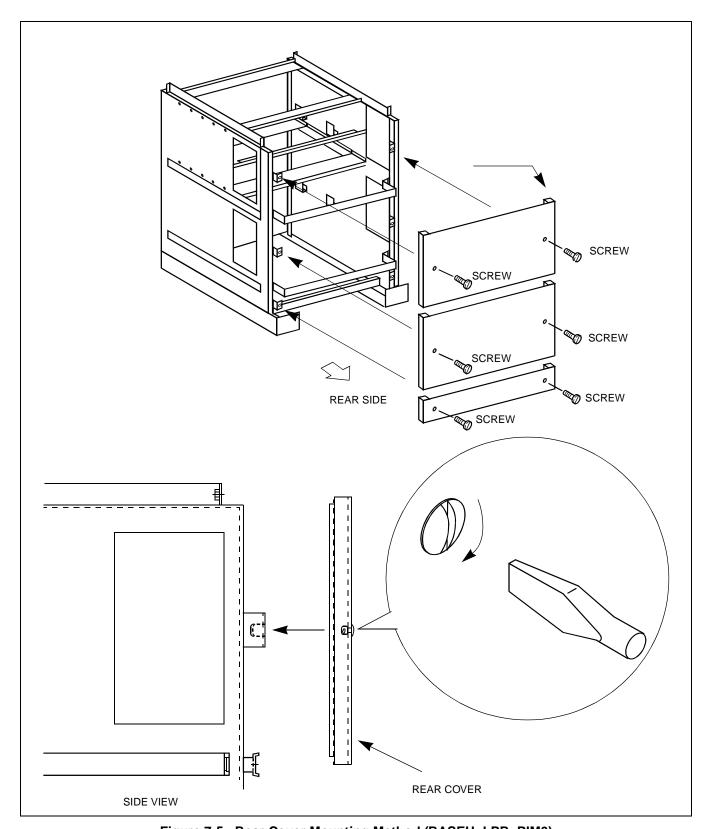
Rear Cover Mounting Method (BASEU+LPR+PIM0)
